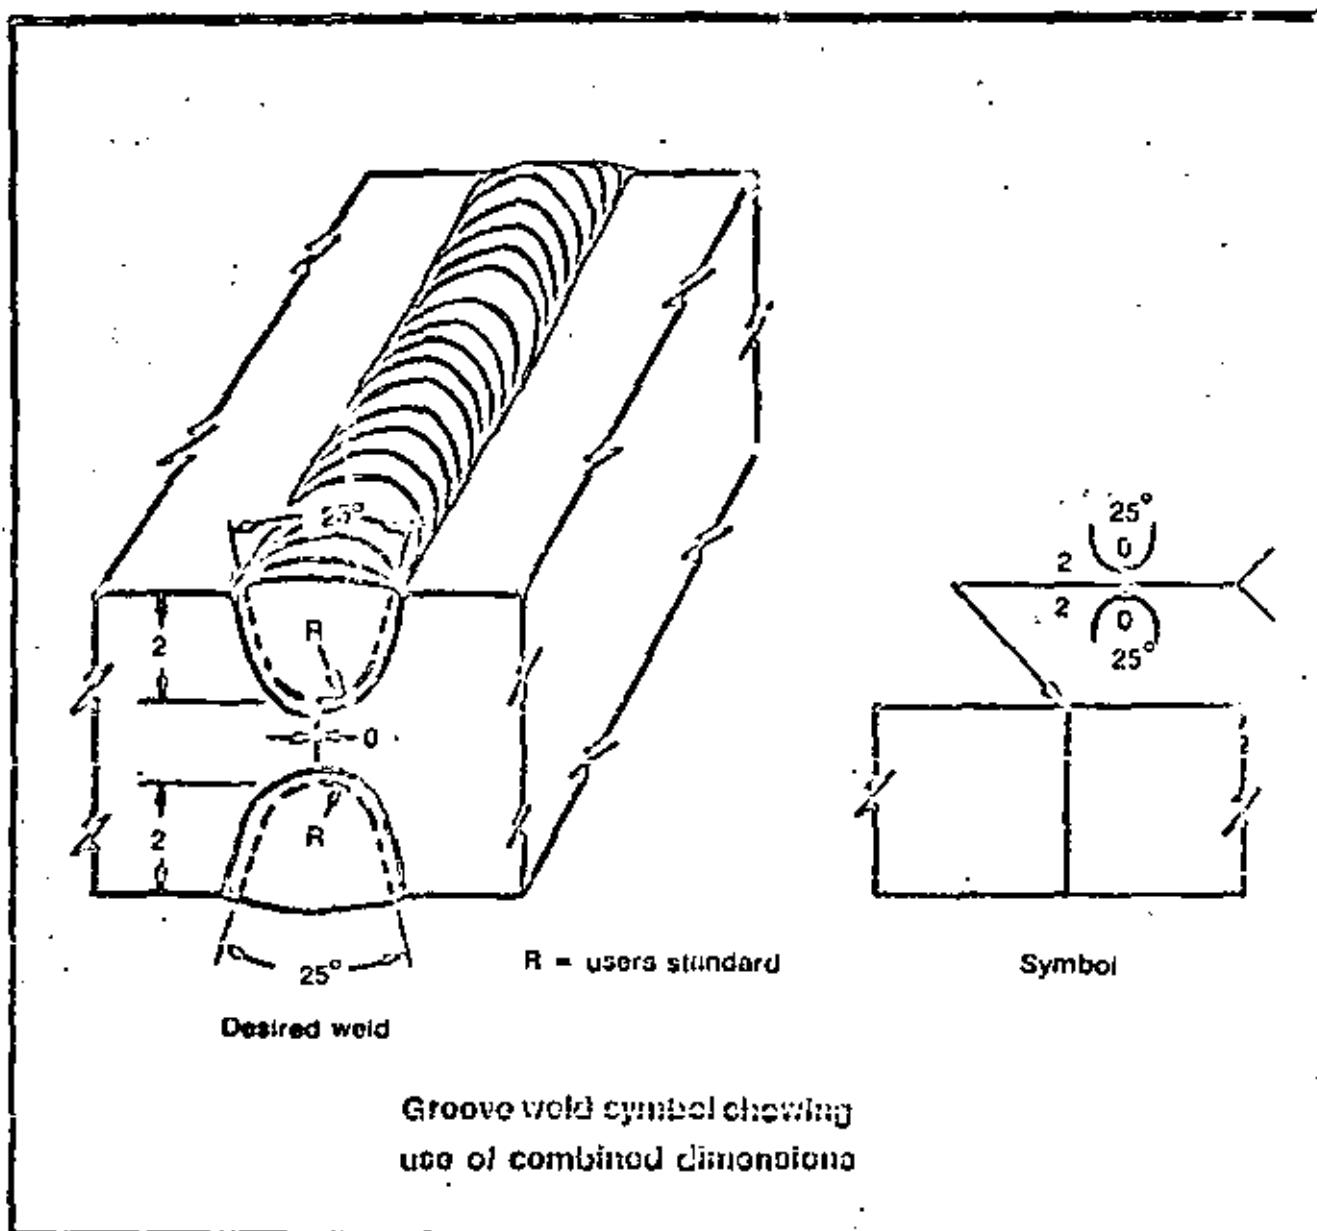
Application of dimensions to groove weld symbols.
